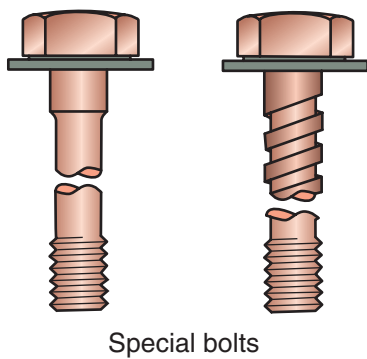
Special bolts are used in various places on a power equipment engine. Be sure to use the correct bolt when reassembling! Copyright by American Honda Motor Co., Inc. and reprinted with permission.
